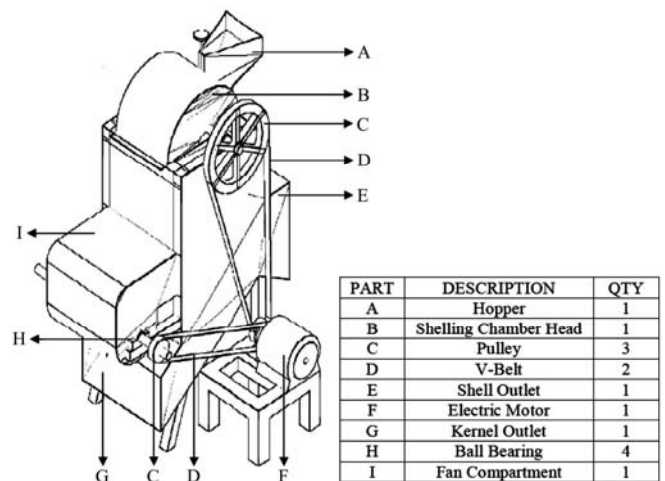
Parts description of isometric view of the moringa seed shelling machine
